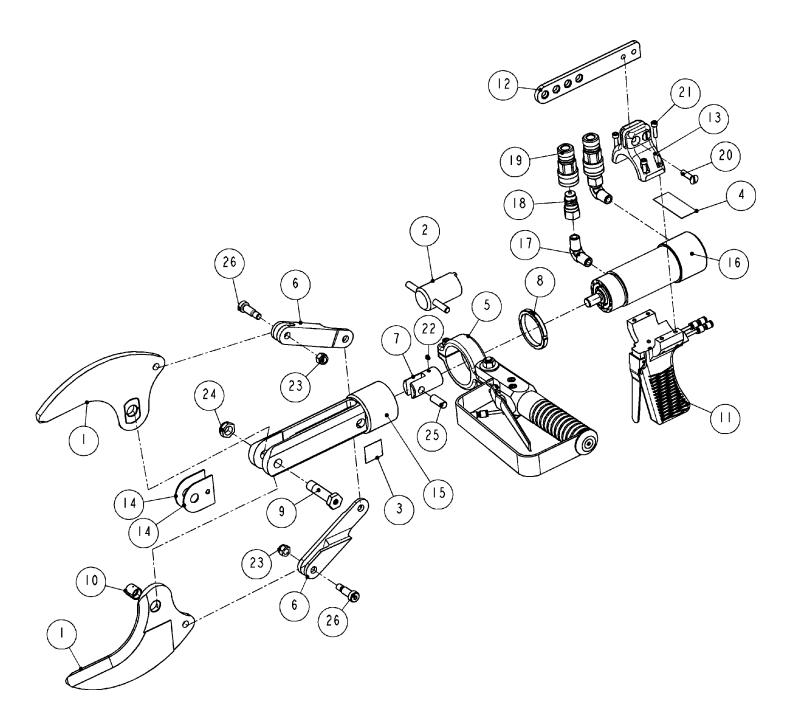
MODEL "M-5" - MAIN ASSEMBLY
